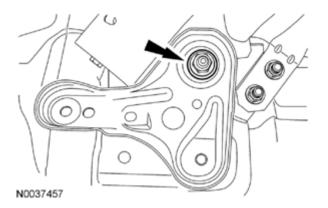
Locating Rear Subframe Nut And Subframe Bracket Courtesy of FORD MOTOR CO.
